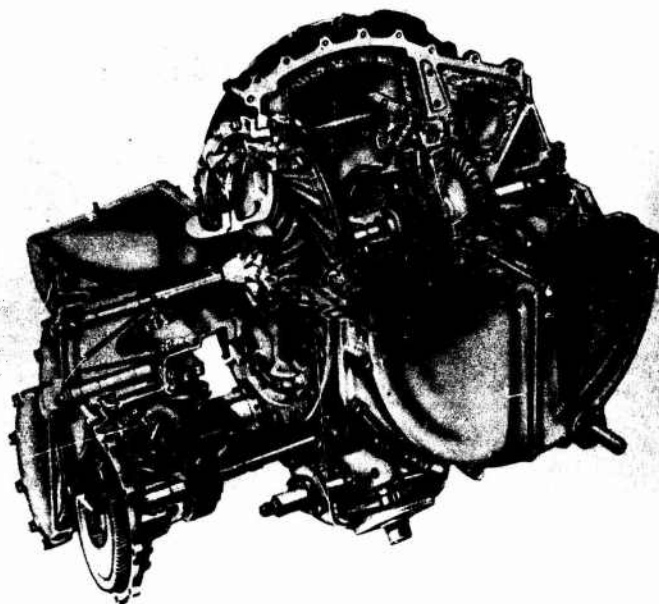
Cutaway View of Chrysler Corporation Model A-831 Turbine Engine, Showing Twin Vertical Rotating-Disk Metal-Matrix Heat Exchanger
